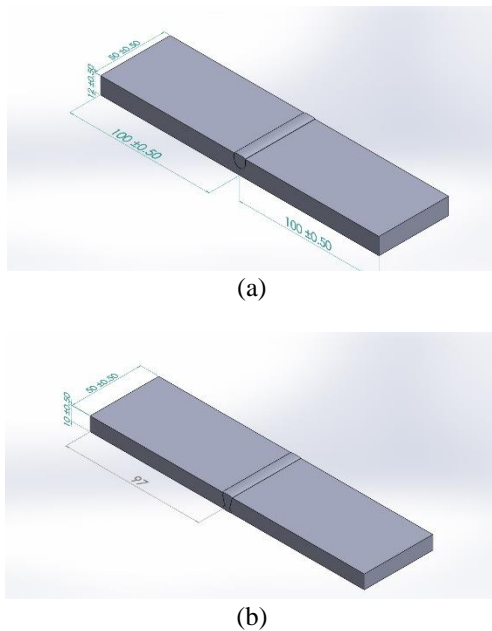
SOLIDWORKS joint design: (a) U joint; (b) unsymmetrical double U joint
